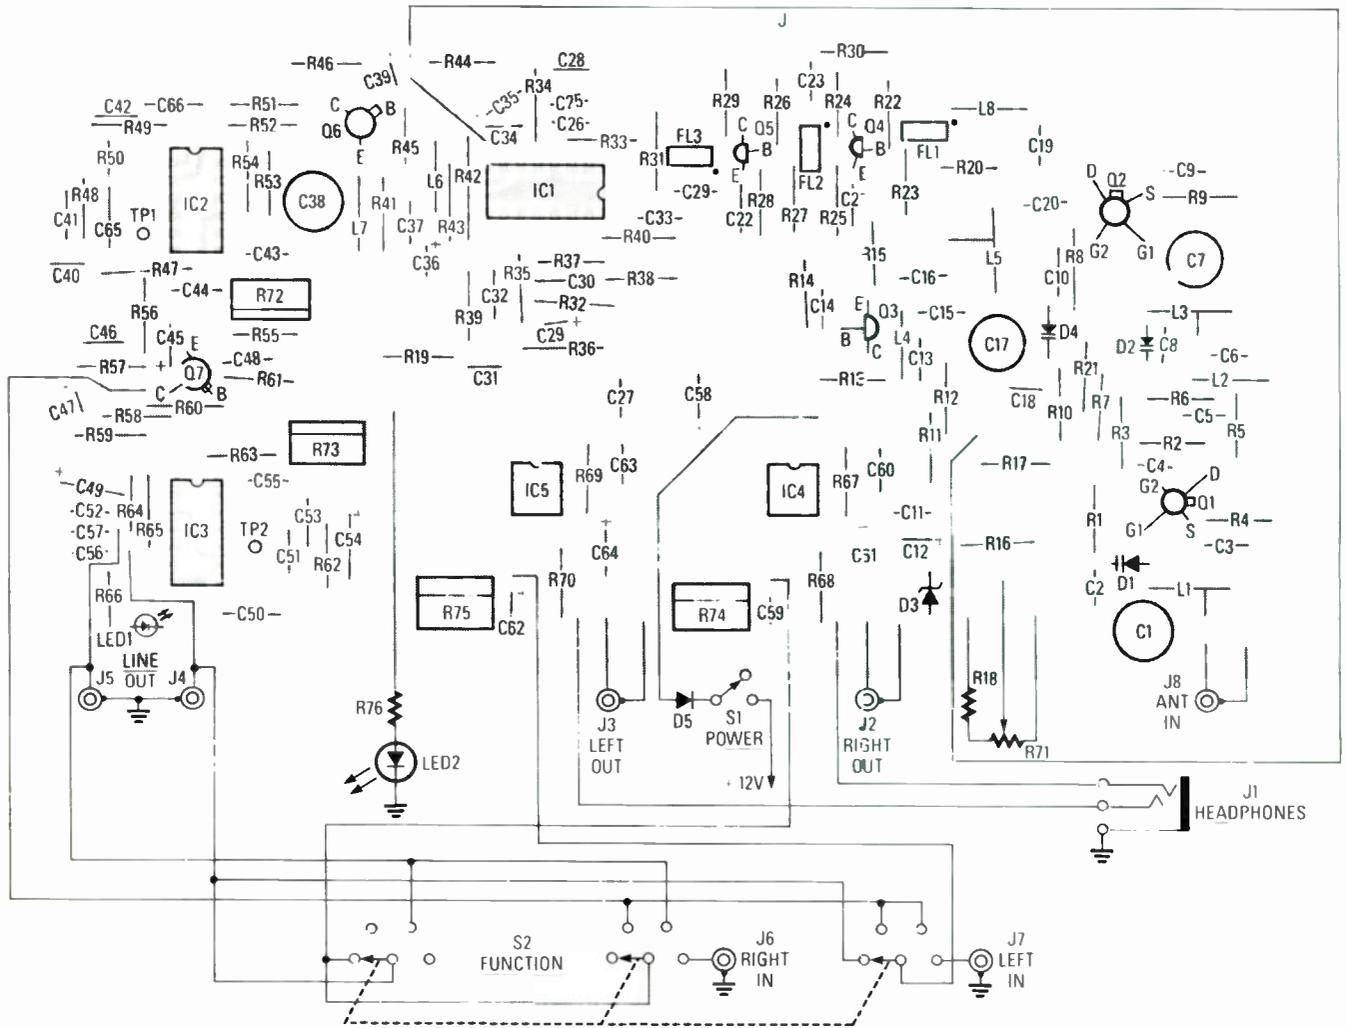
MOST OF THE COMPONENTS mount on a single-sided PC board. However, for best results, we recommend removing R71, replacing it with a multiturn potentiometer, and mounting that unit on the front panel.
